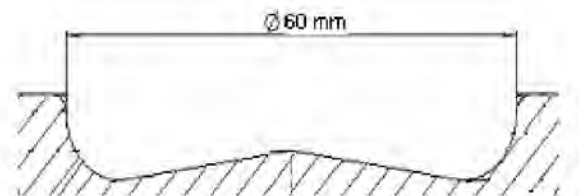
Piston bowl geometry C, with a piston bowl diameter of 60 mm
